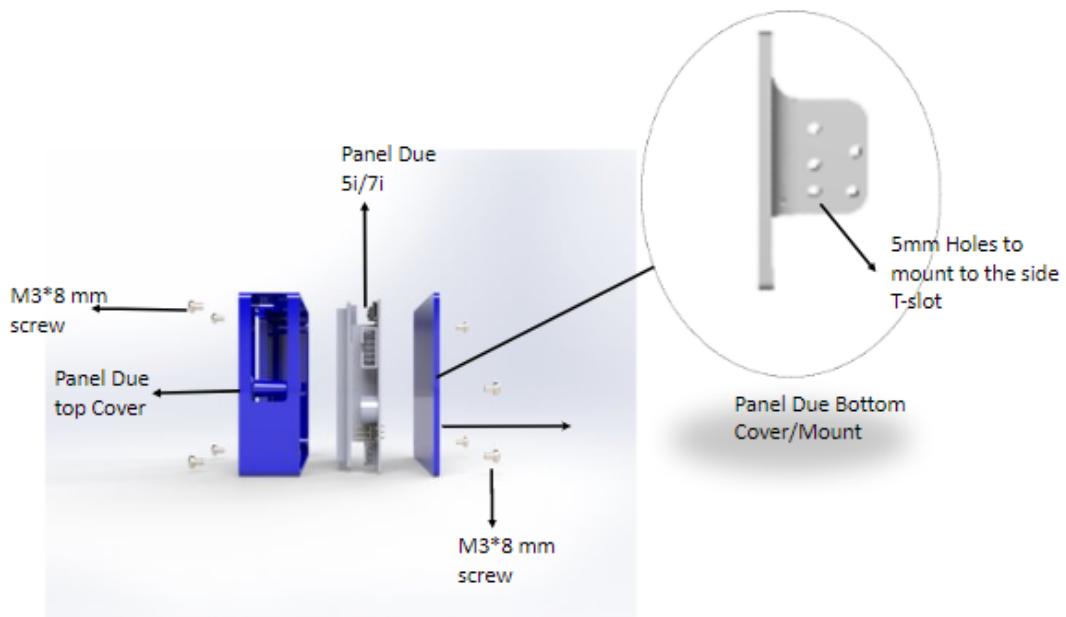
Sequence on mounting the casing to the Panel Due and mounting it to the Printer
